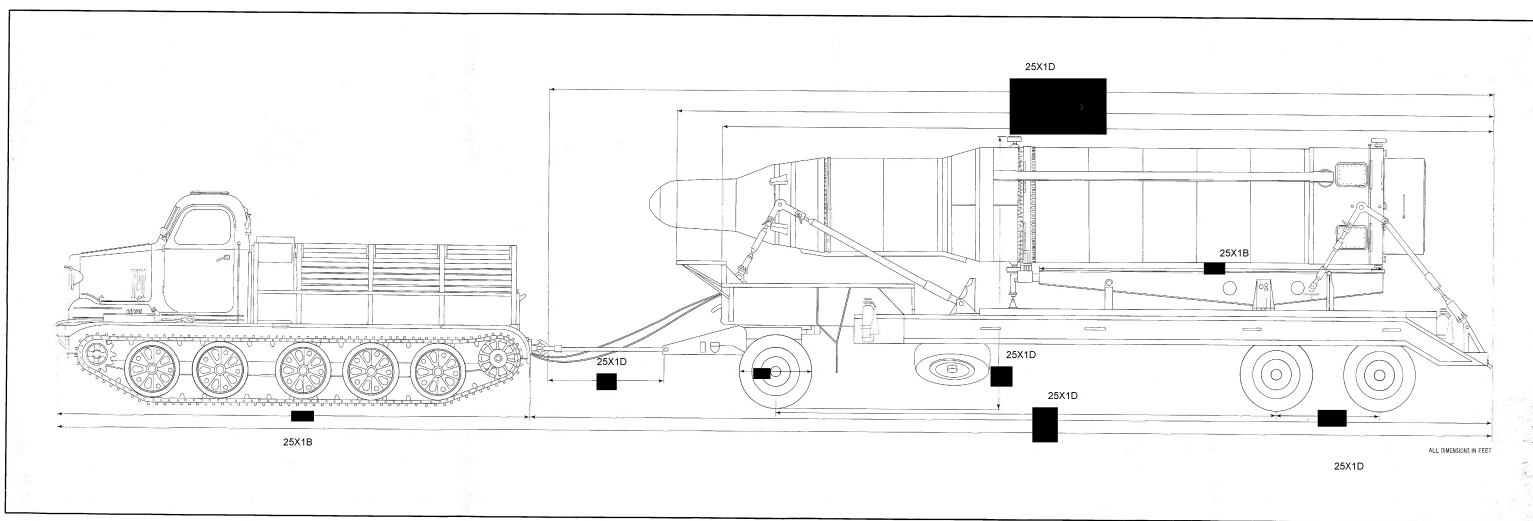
DIMENSIONAL DRAWING OF THE SEAB MISSILE, TRAILER, AND AT-3 TRACTOR.
